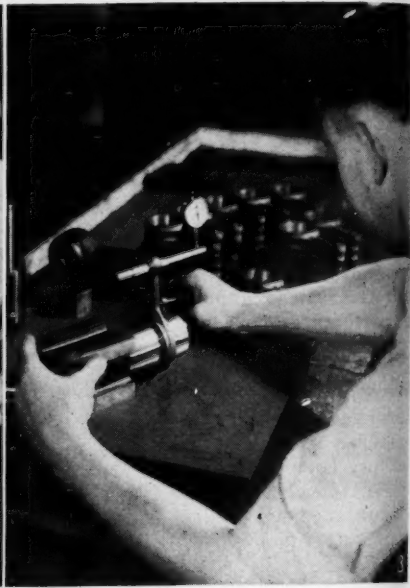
Gaging the diameter of the piston hole after it has been honed. The Zeiss "Passimeter" indicates any variation in diameter or concentricity. Fig. 3—Checking alignment of the hole in the connecting rod.
